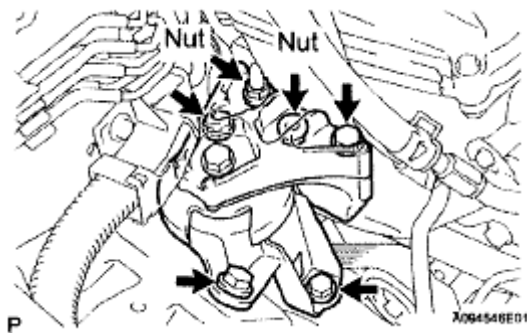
Locating Engine Mounting Insulator, Nuts And Bolts
